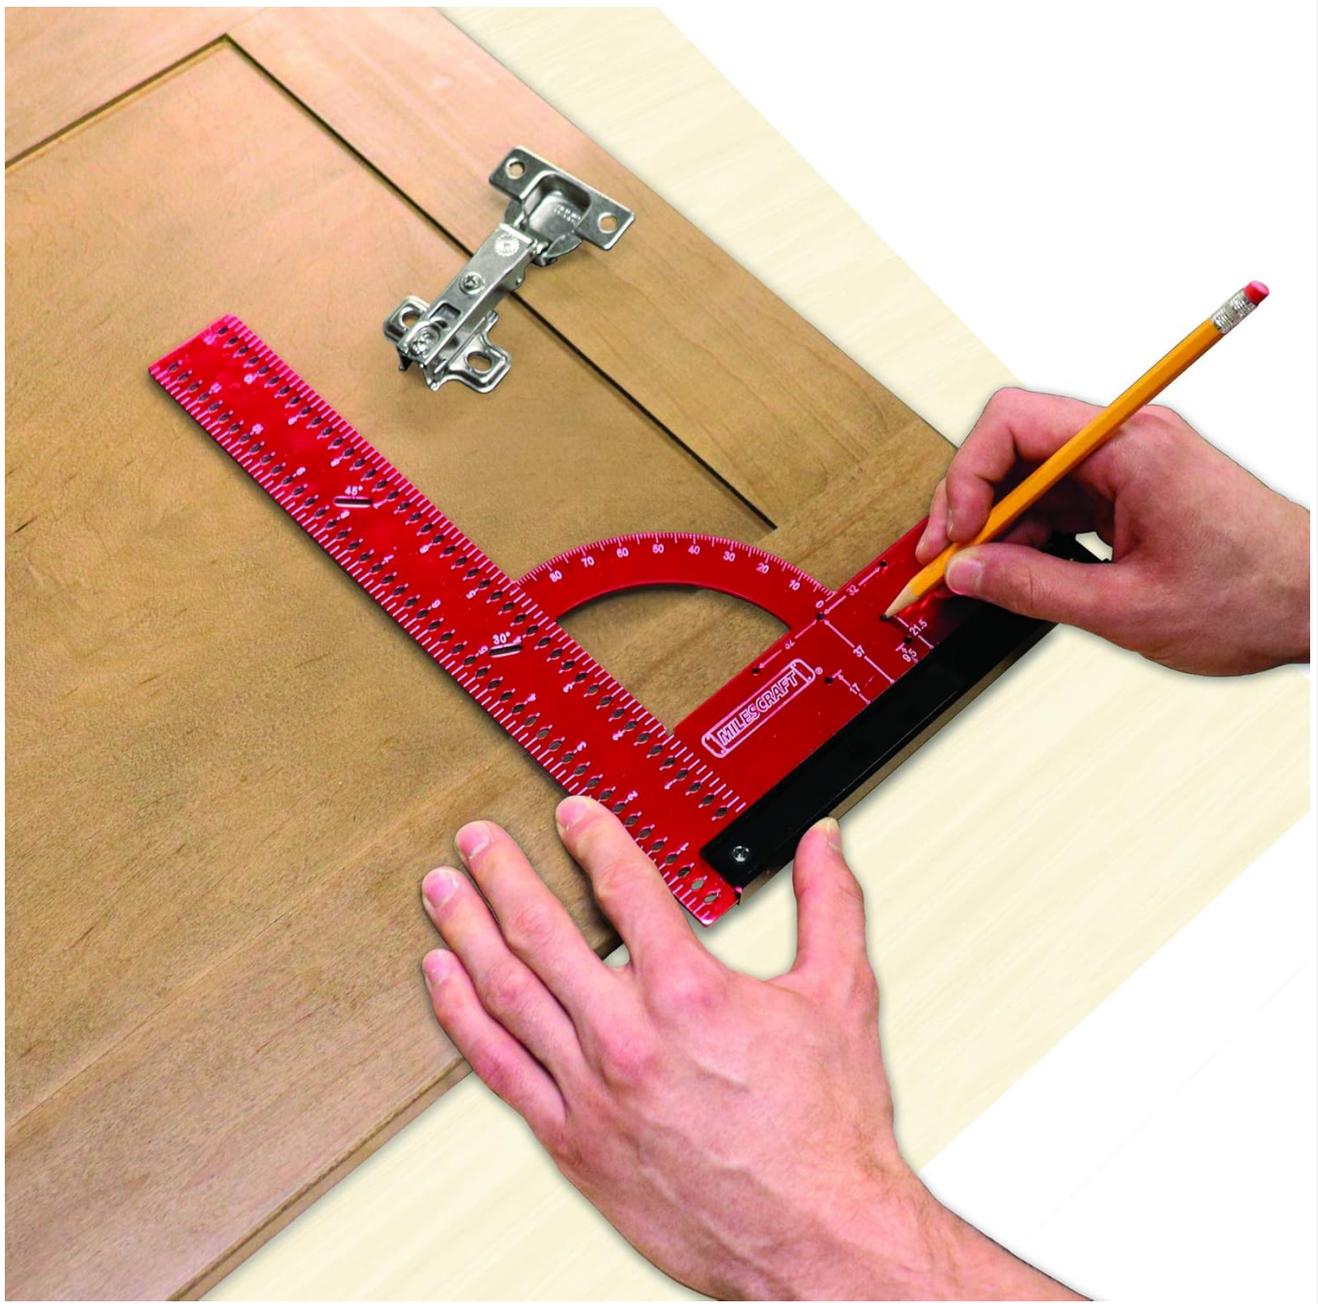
A user marking screw holes for a European-style cabinet hinge using the MilsCraft MC-Square300's integrated hinge mounting guides.
